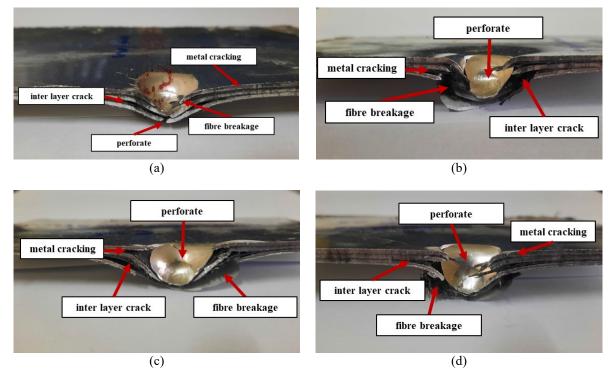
Fractured cross-sectional view of carbon fibre metal laminate at different speeds: (a) 1 mm/mm, (b) 5 mm/mm, (c) 10 mm/mm and (d) 50 mm/mm
